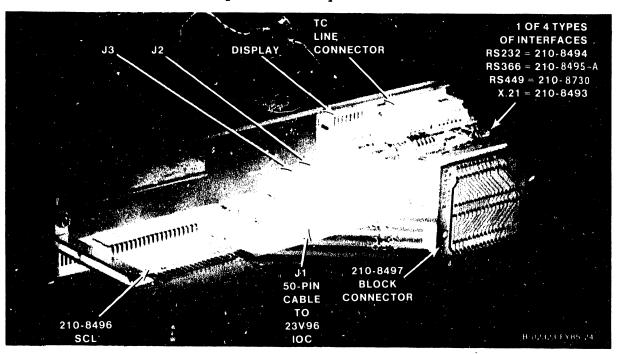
270-1003 Multiline TC Back Panel Assembly
